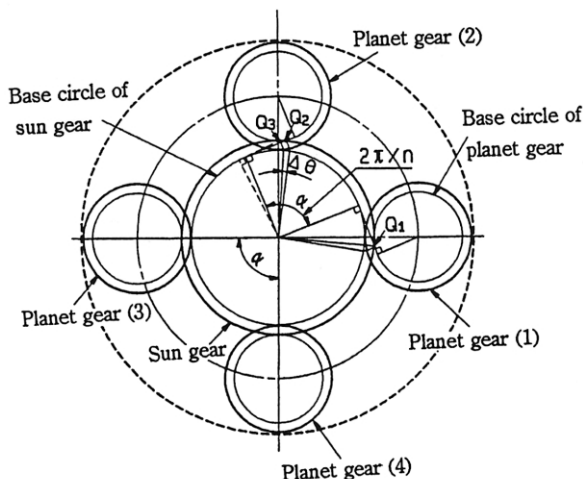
Schematic drawing of meshing phase difference in planetary gear drives with four planet gears
